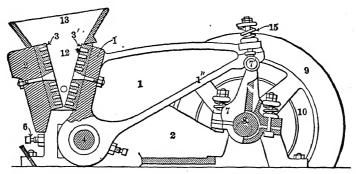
1, lever with short arm 1', and long arm 1"; 2, cast-iron frame; 3, fixed jaw-plate 3', movable jaw-plate; 4, fulcrum pin; 6, set-screw; 7, connecting rod; 7', projecting pin; 8, eccentric shaft; 9, flywheel; 10, pulley; 12, throat; 13, hopper; 15, spring.
